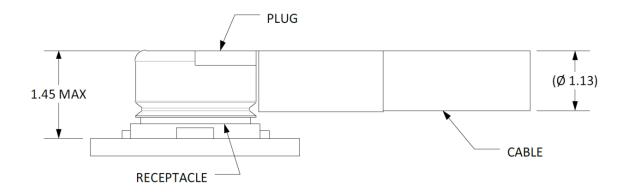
Connection between RF Connector and Mating Plug Using Ø 1.13 mm Coaxial Cable
